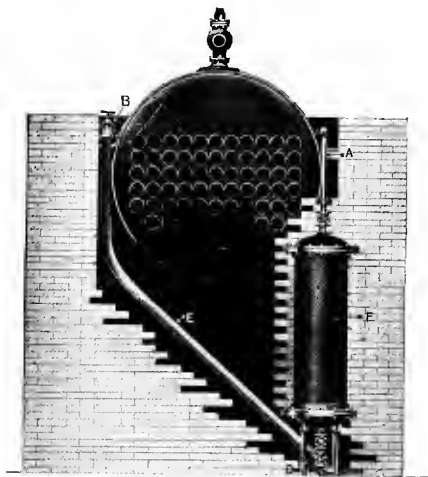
Sectional View of Horizontal Boiler Connection.
